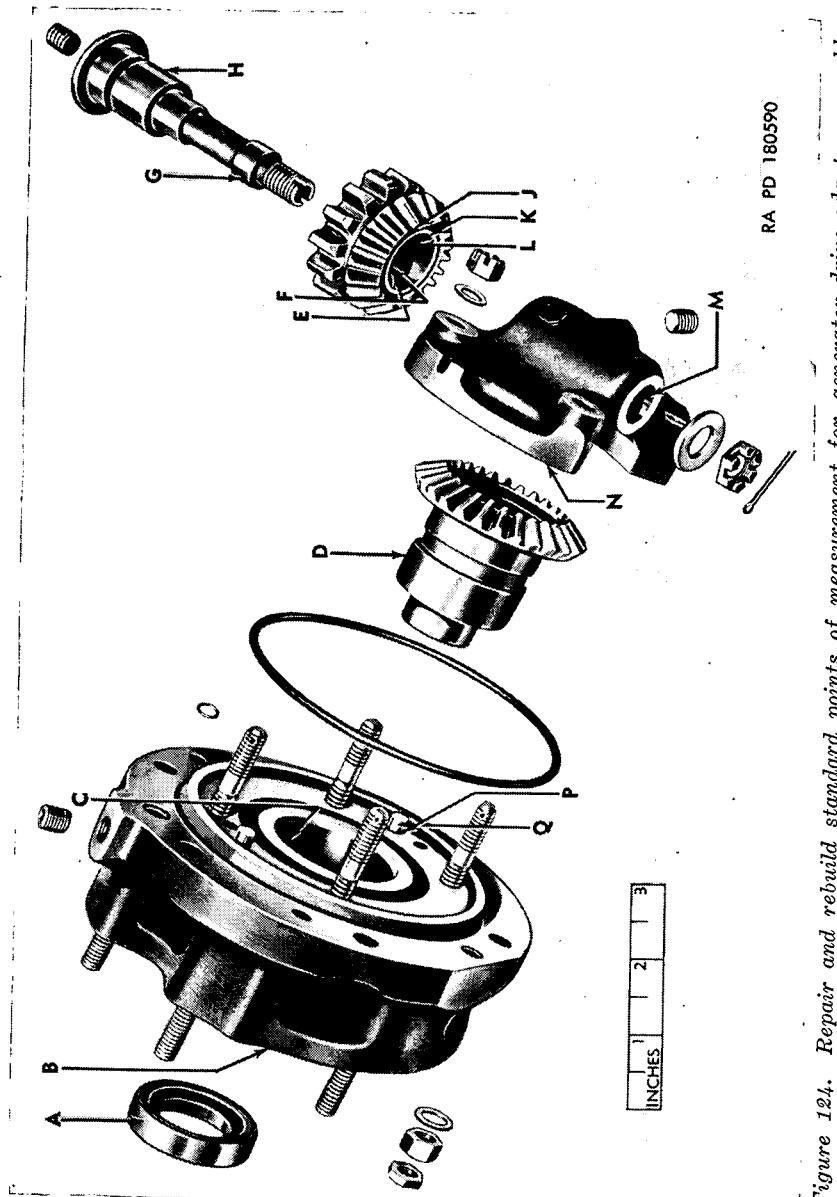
Repair and rebuild standard points of measurement for generator drive adapter assembly.
